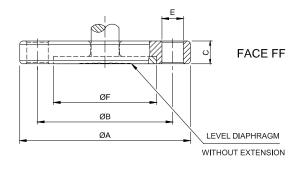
(d) - Dimensional Drawing and Mounting Position for LD292 - Level
